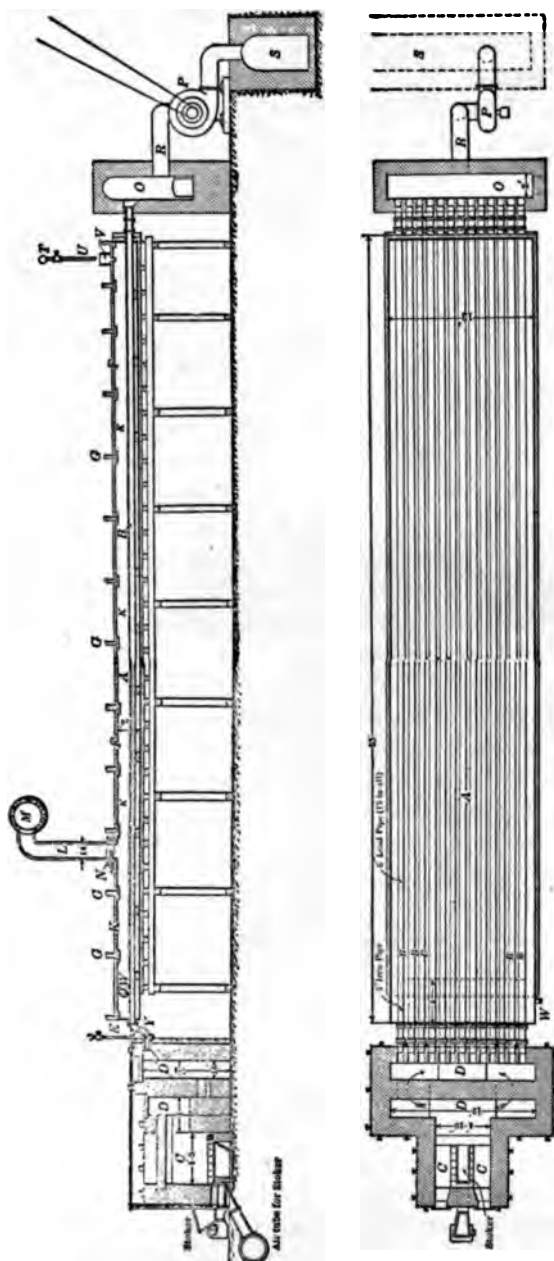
and 72. — PAN EVAPORATOR, LONGITUDINAL VERTICAL SECTION AND PLAN.
